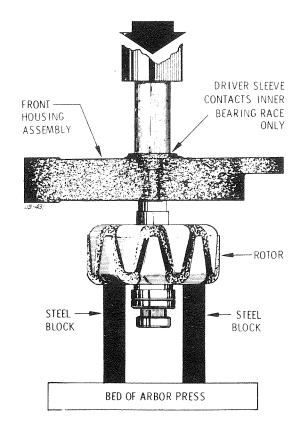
ASSEMBLE FRONT HOUSING TO ROTOR
